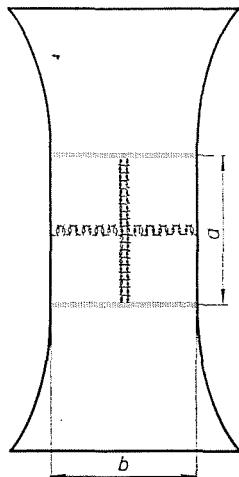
Shape of a fabric sheet on a flat knitting machine, indicating the (a, b) measuring range
